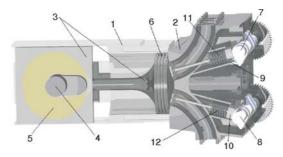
CAD model with basic parts of new QCV SI engine [37]
